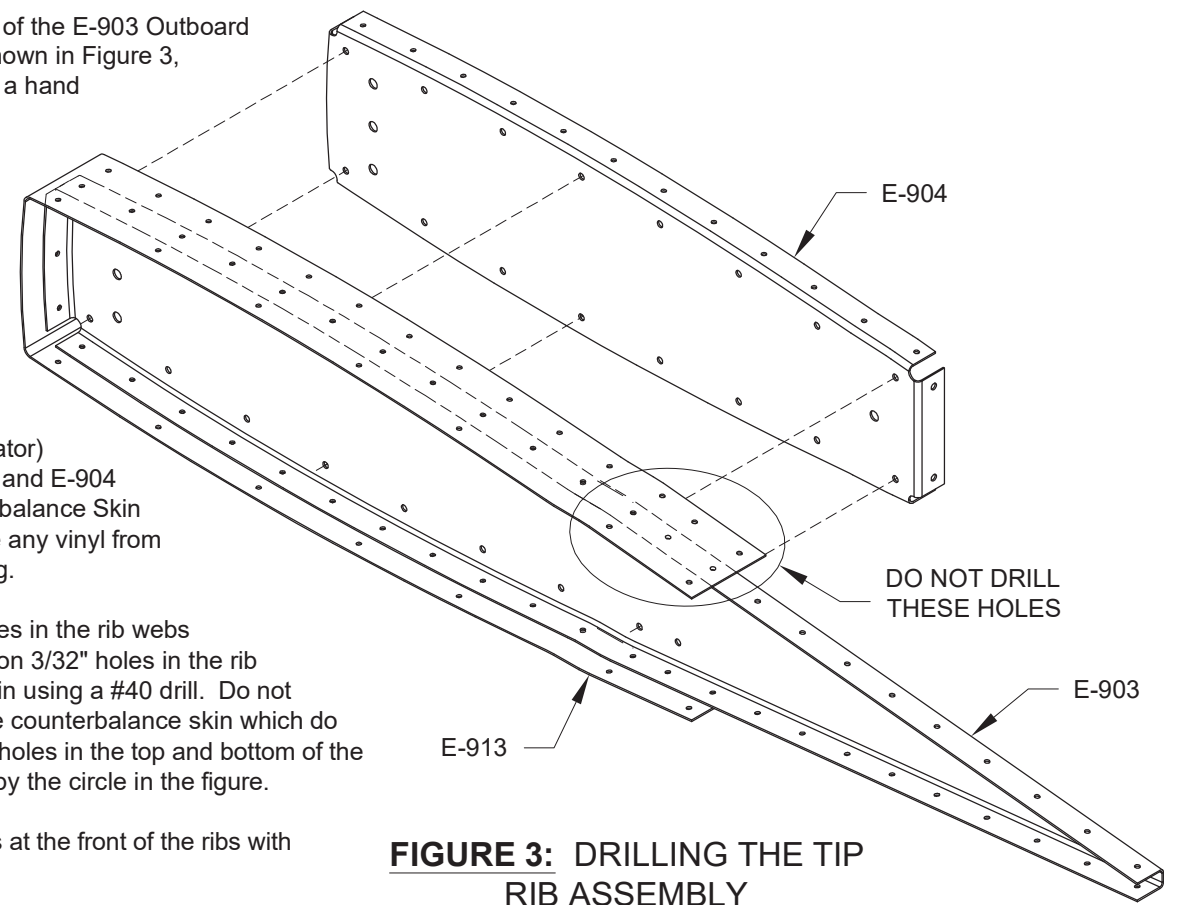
DRILLING THE TIP RIB ASSEMBLY
